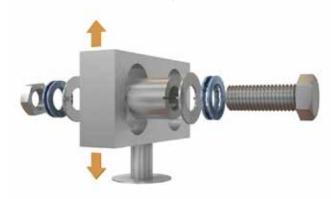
Drawing of the test rig. The assembled parts are vibrated vertically and the joints are subjected to two impacts per cycle. The impacts are parallel to the bolt. The arrow displays the direction of vibration during the test. After testing, the fasteners are inspected for rotation.
